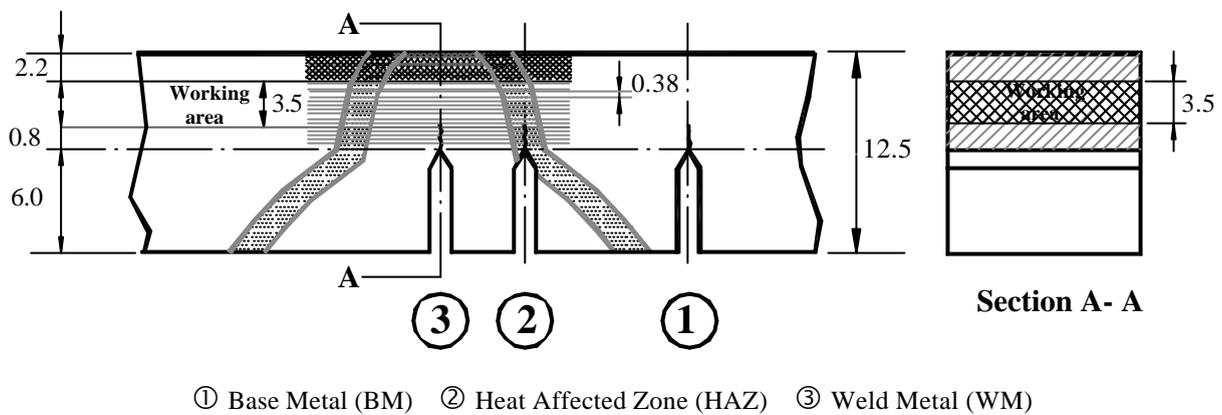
Notches positions and dimensions of the specimen used for fatigue propagation tests.
